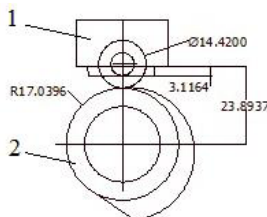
High-pressure pump cam profile of Kubota D1703-M-DI engine. 1. Roller shaft, 2. High-pressure pump camshaft.
